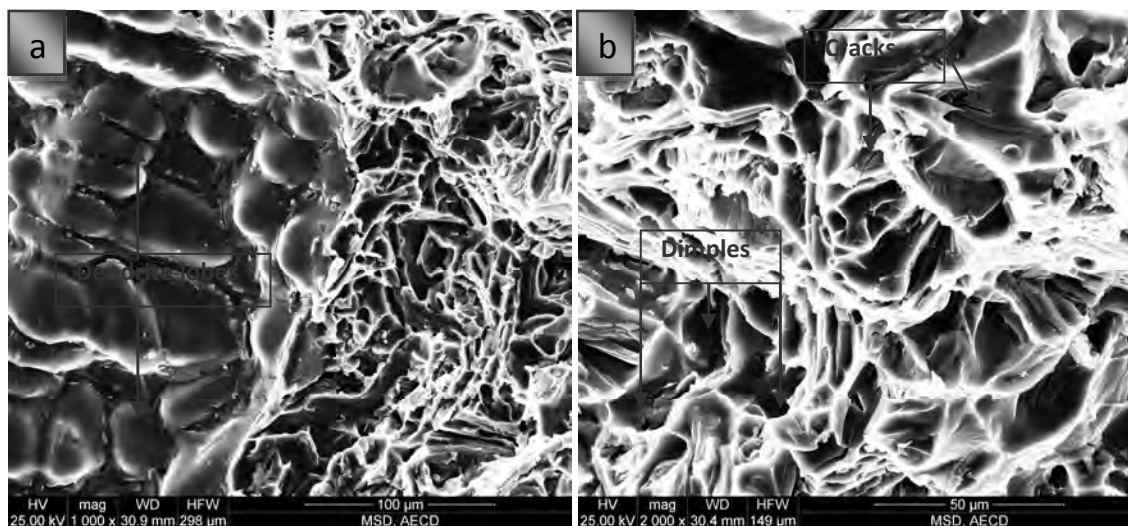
Fracture surface morphology of the peakaged Alloy-1 after impact test
